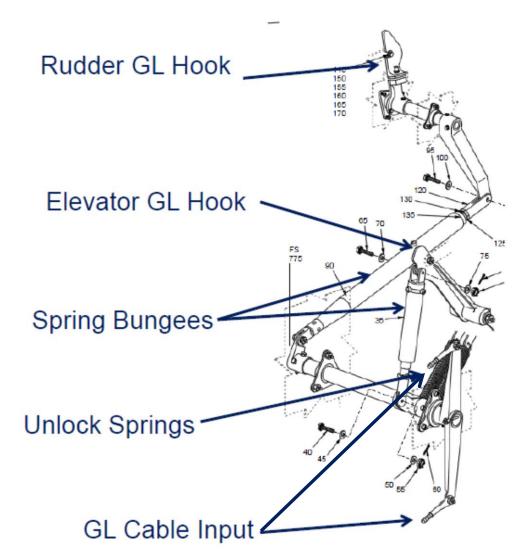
Diagram of the Elevator and Rudder Gust Lock Hook Mechanism
